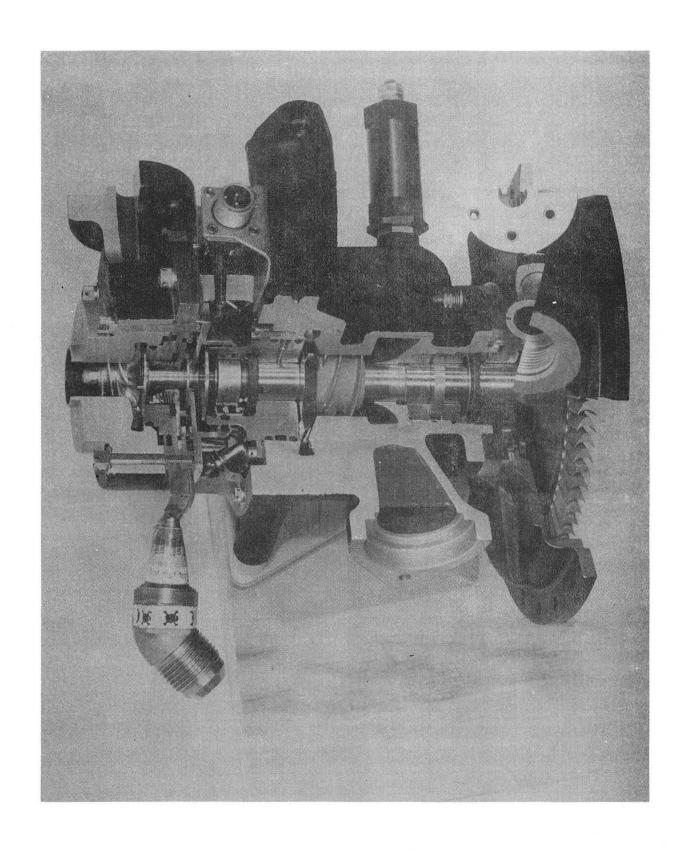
Auxiliary Pump Drive Assembly, Titan I
